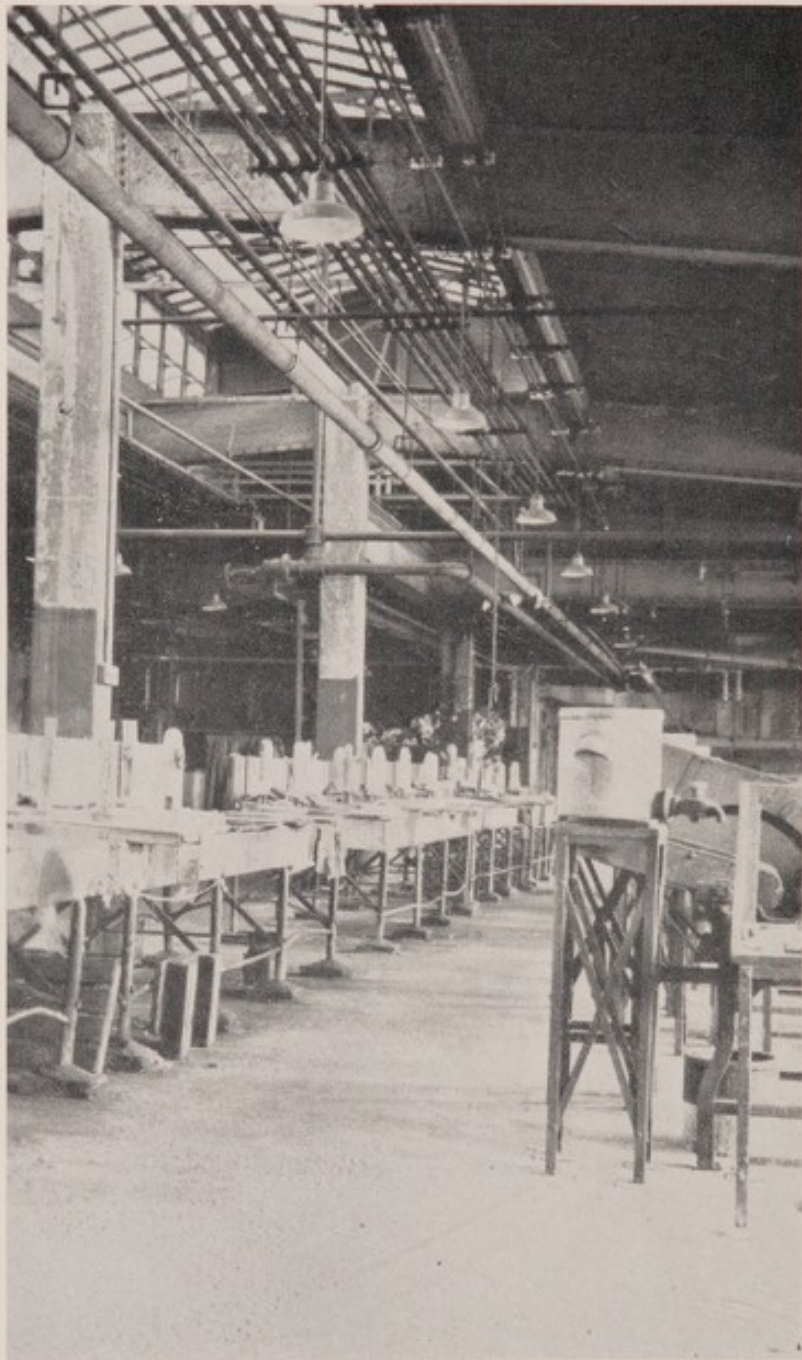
MODERN CARROTING ROOM FOR BOTH HAND AND MACHINE CARROTING.
